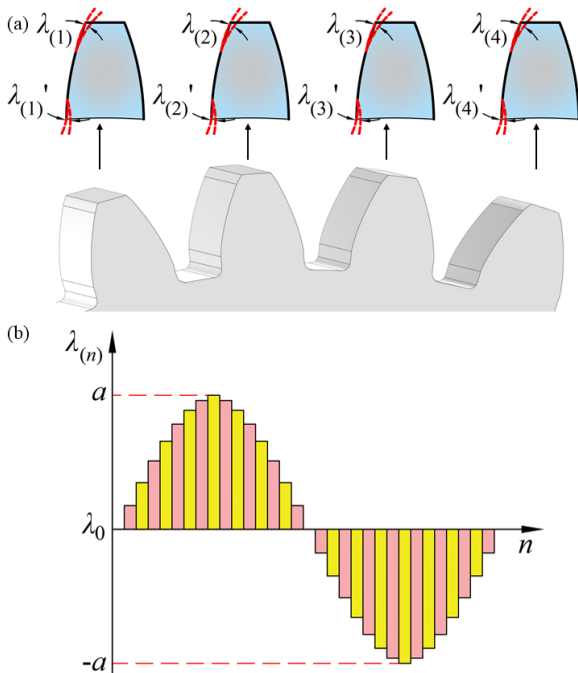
Sinusoidal design method for gear tooth modification amounts, a) Gear tooth modification amount arrangements, b) Change rule of gear tooth modification amounts
